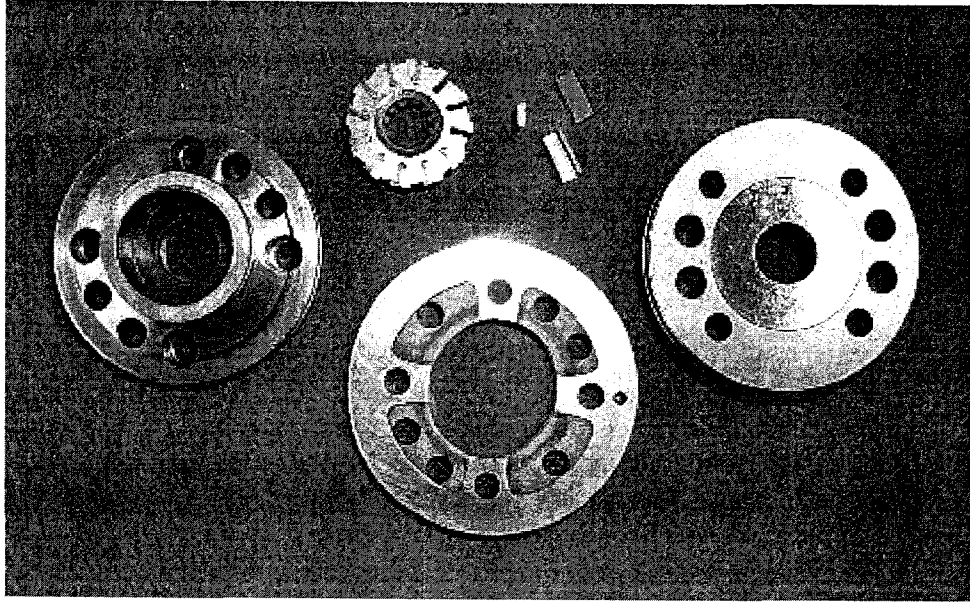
Vane Pump Parts (vane, rotor, cam-ring, side-disk)
